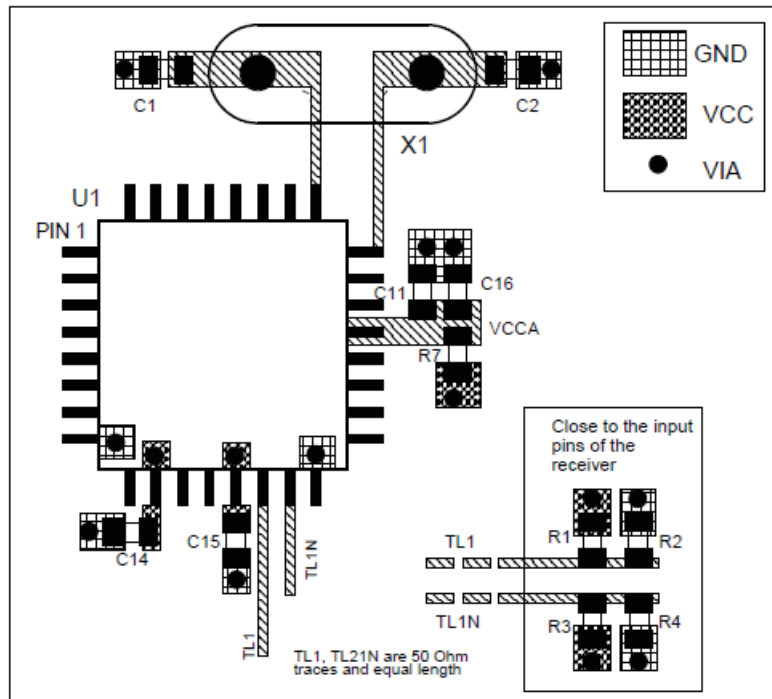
B. PCB BOARD LAYOUT FOR 8430I-61
